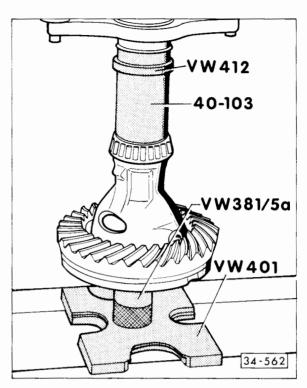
Heat inner race of tapered roller bearing to about 100° C, install and press home
